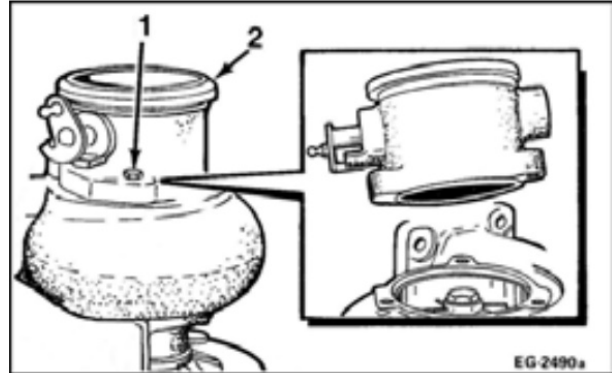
Removing EBP Control Valve (Late 1997 Model Year Shown)
